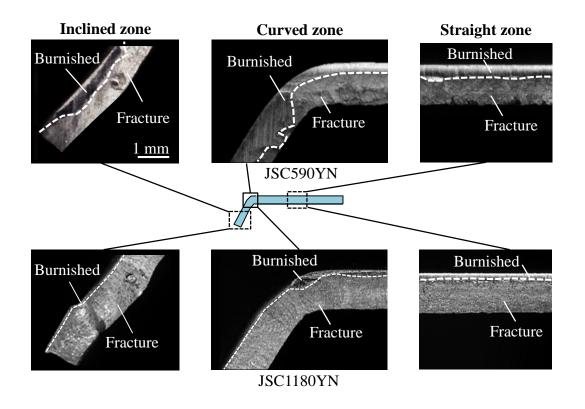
Sheared edge surfaces of JSC590YN and JSC1180YN steel sheets at inclined, curved and flat zones for trimming with flat punch.
